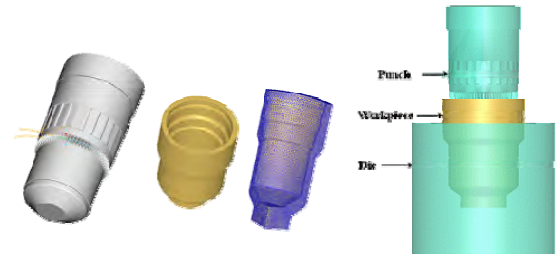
The drawing of ARD 370 hub punch in cold forging process
